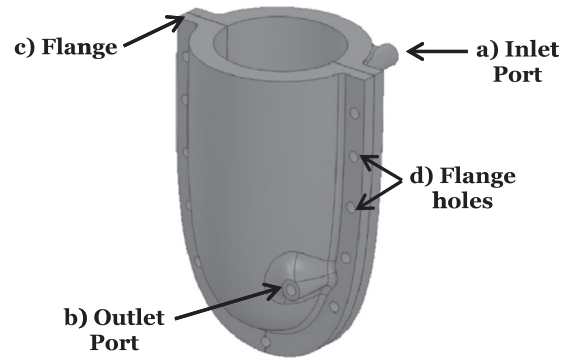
Details of proof-of-concept sockets including: (a) inlet port, (b) outlet port, (c) flange and (d) flange holes. In an actual prosthetic socket, there would be no need for the flange.
